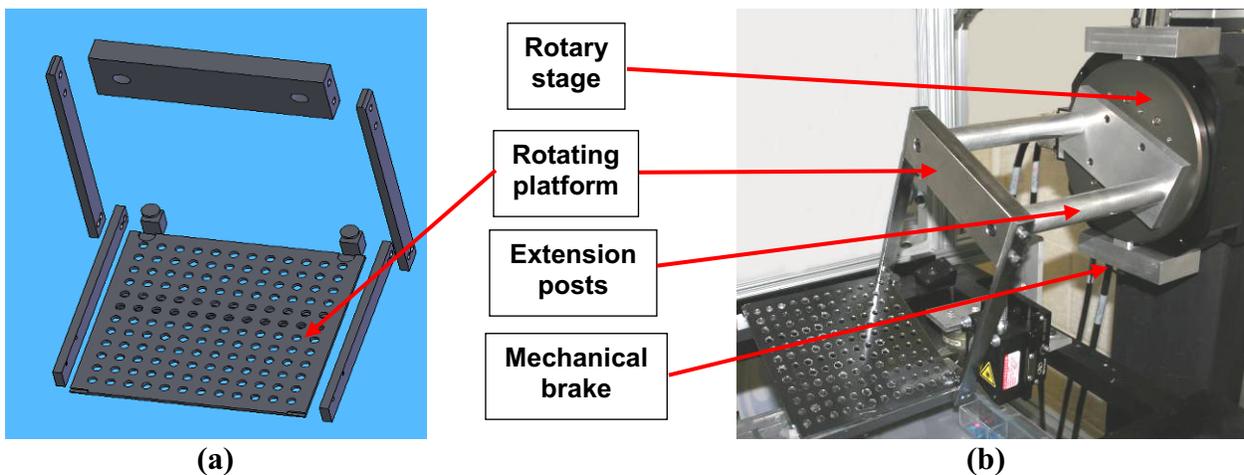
(a) Platform assembly exploded view, (b) Platform assembly.
